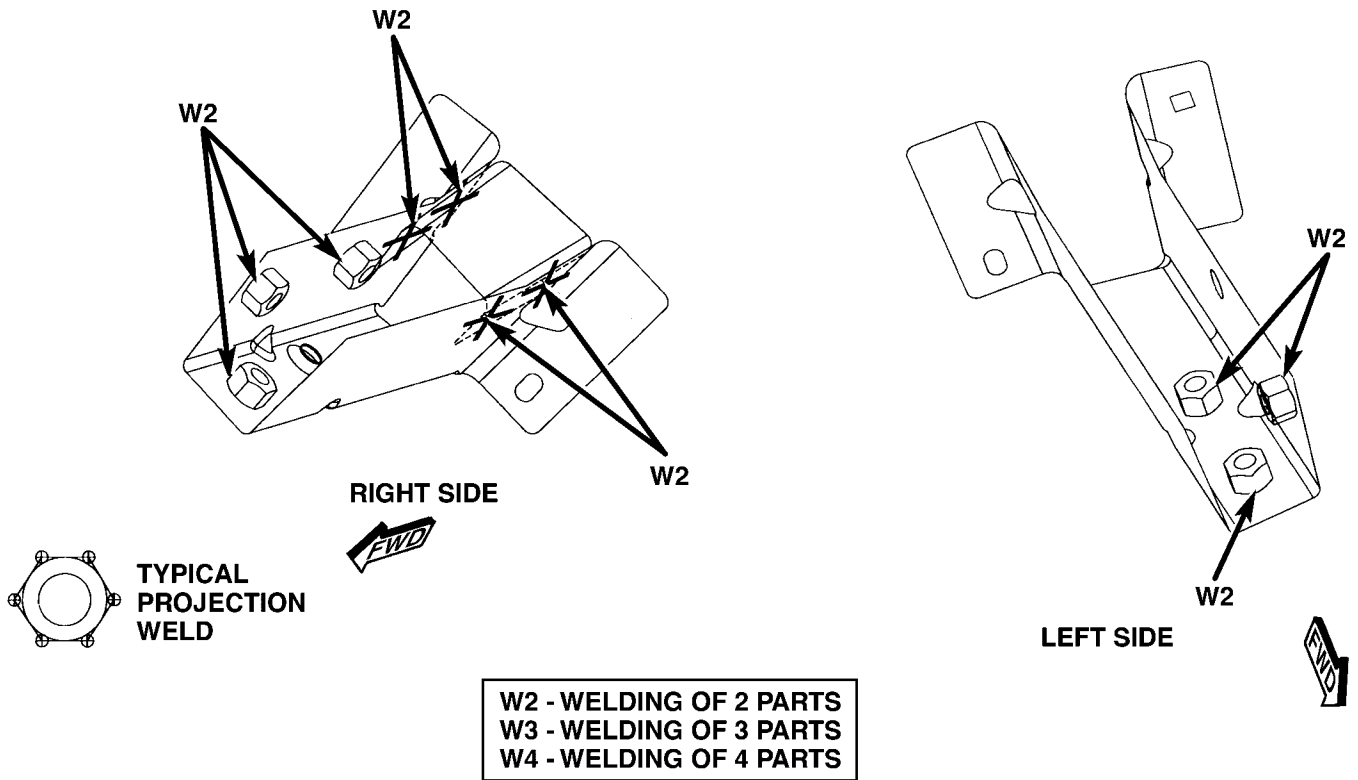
REAR BUMPER ATTACHING REINFORCEMENT TO REAR RAIL BUMPER ATTACHING BRACKET
